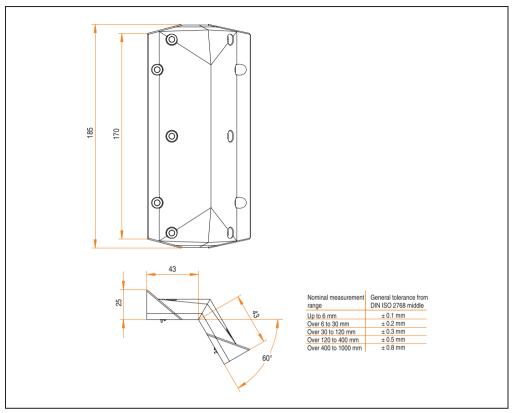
Dimensions - extension connector 60° 5AC800.CON2-00
